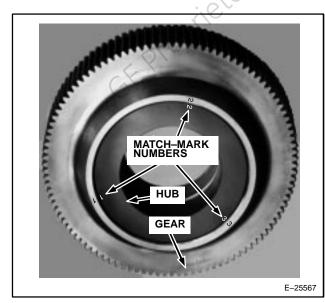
Match–Mark Numbers on Pump Drive Gear.
